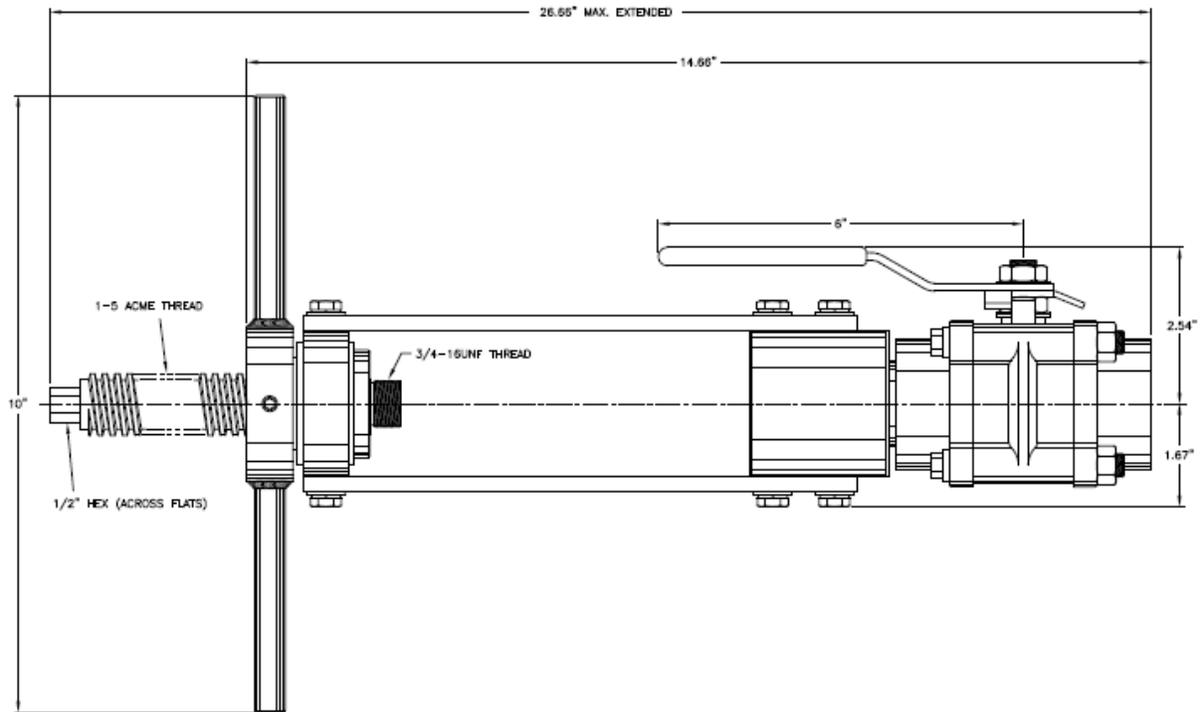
7642 Transducer Extraction Tool (Uninstalled)
